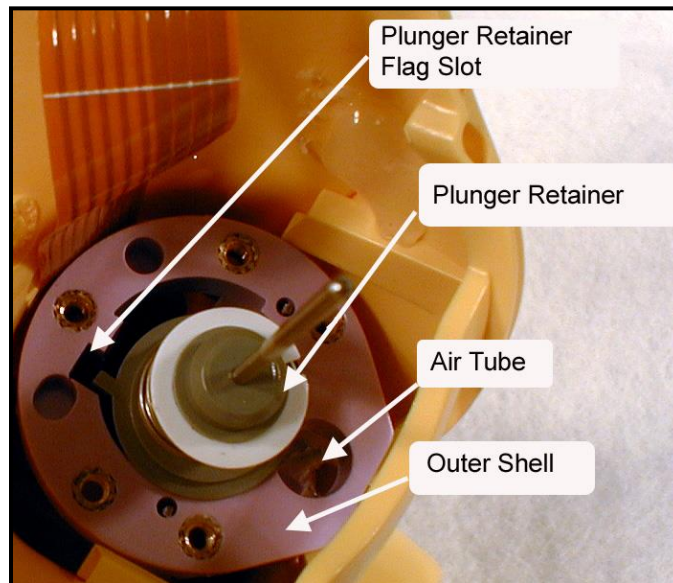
Disconnect Air Tube and Quad O-Ring
